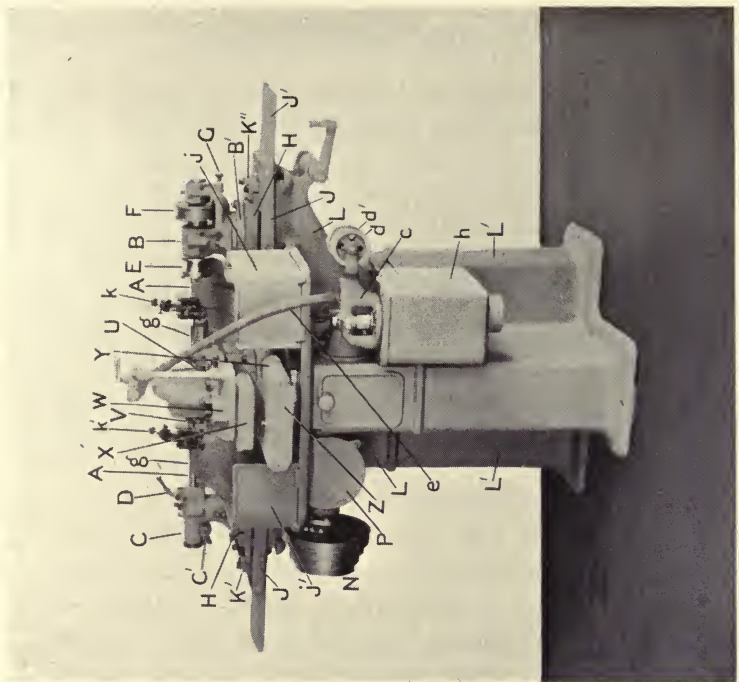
BROWN & SHARPE No. 1 UNIVERSAL GRINDER
